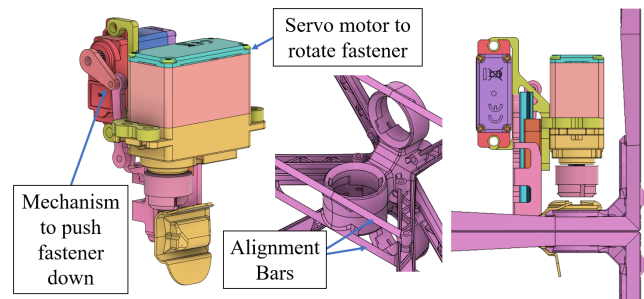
The bolter module (left) has a dual servo motor design and an integrated alignment claw (center). When the grippers are fully extended, the bolters are positioned directly above the fasteners, ready to perform the bolting operation (right).
